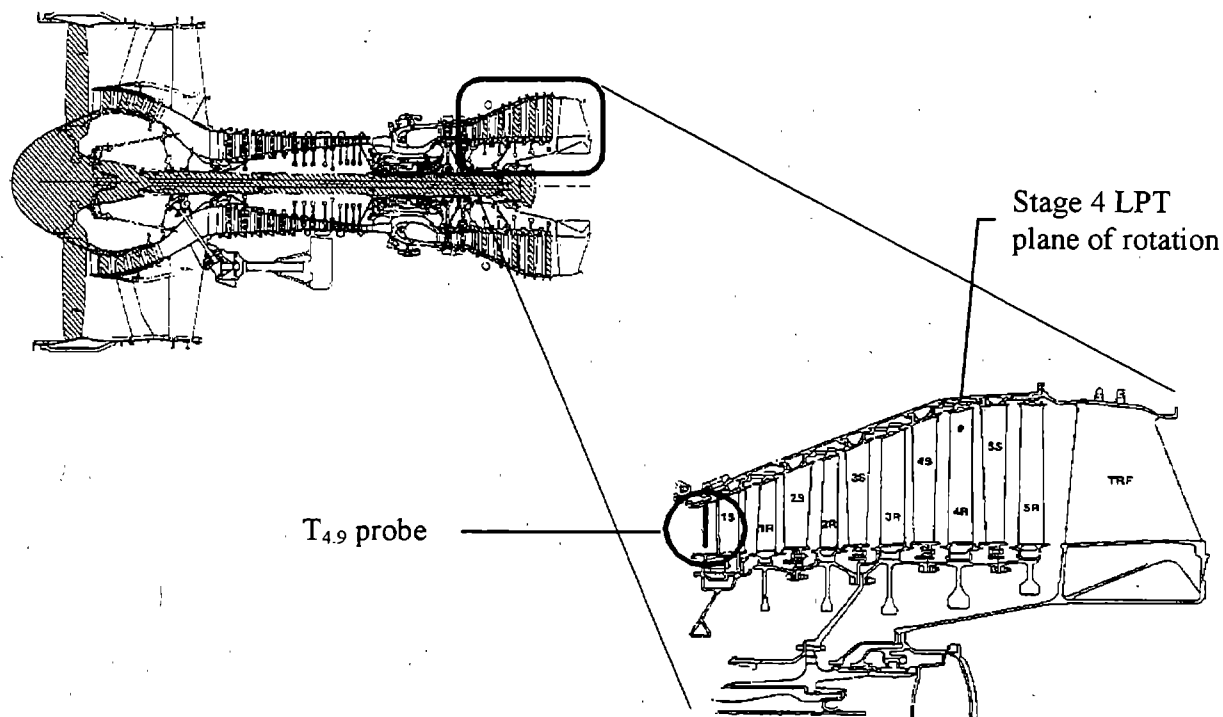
Cross section of CF6-80C2 engine and expanded view of LPT module
